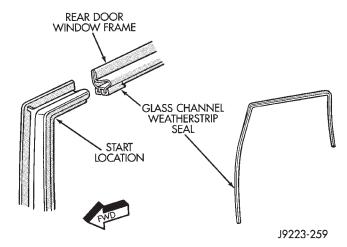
Glass Channel Weatherstrip Seal REAR DOOR FIXED WINDOW GLASS
